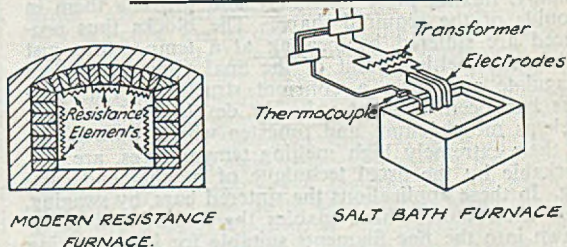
VARIOUS TYPES OF ELECTRICAL FURNACES.
